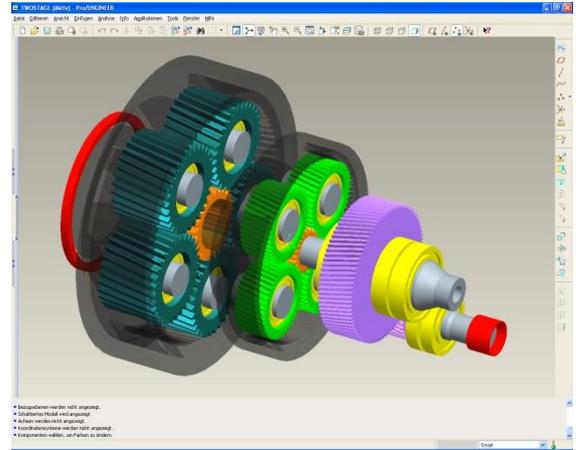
Wind turbine gearbox in Pro/ENGINEER
